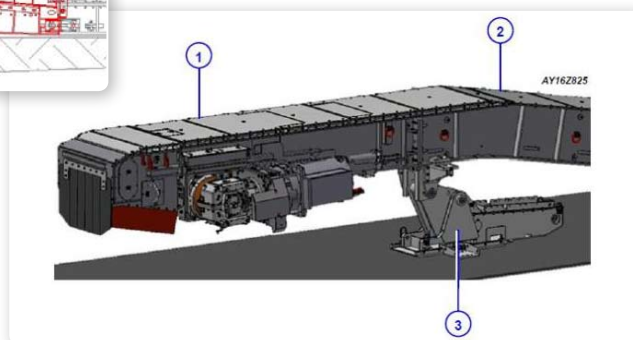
BSL Lifting Aid installed under BSL outbye section including BSL chain, gear box motor and dust hood
